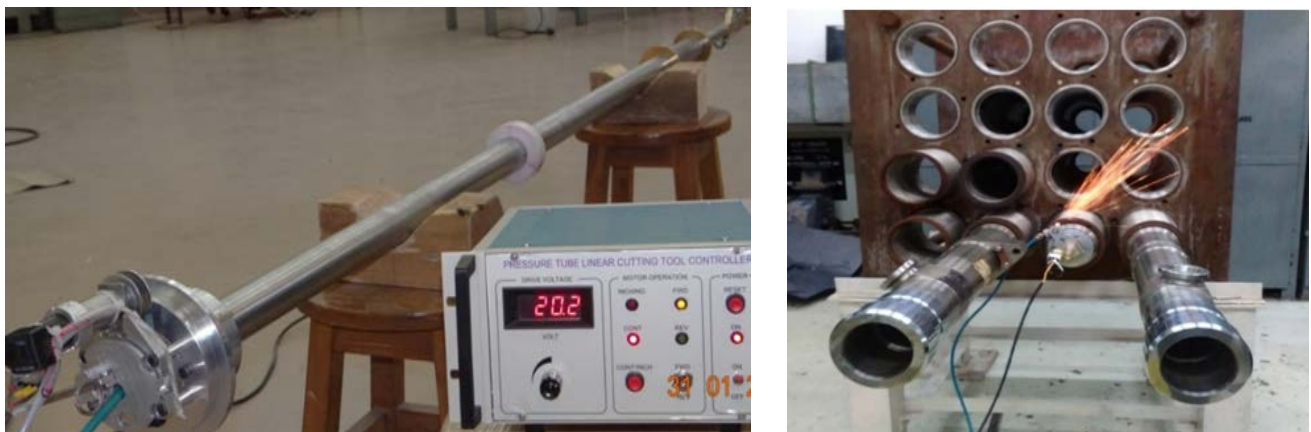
(a) A view of underwater laser cutting tool for pressure tube stubs, and (b) laser cutting mock-up of bellow lip after cutting of outboard end-fitting.
